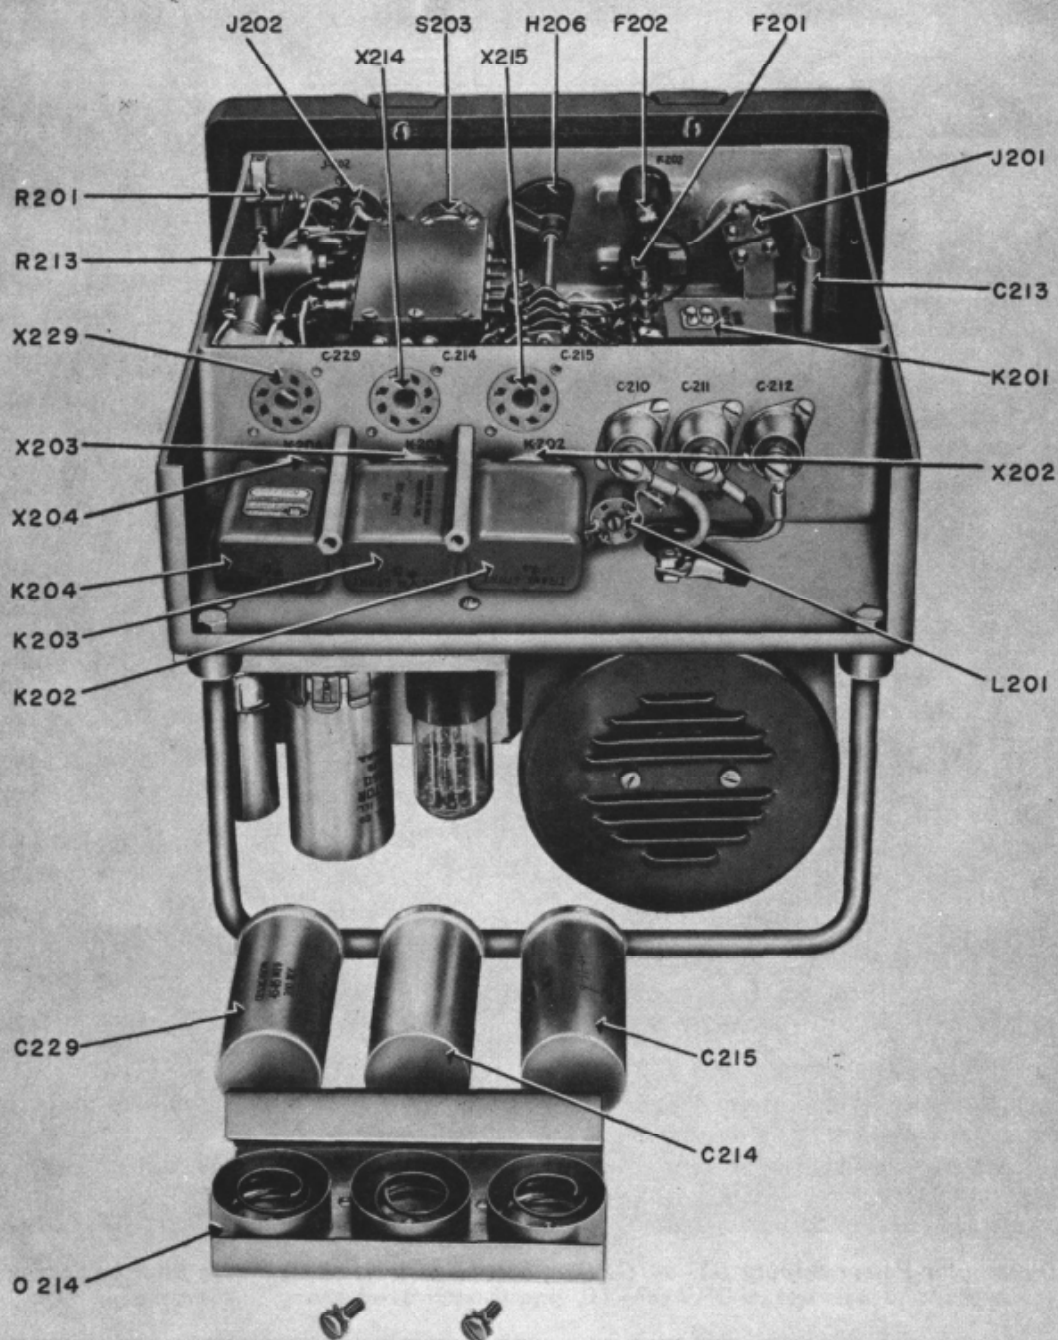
Dynamotor-Power Supply DY-88/GRC-9, bottom view of chassis with filter box cover removed.
